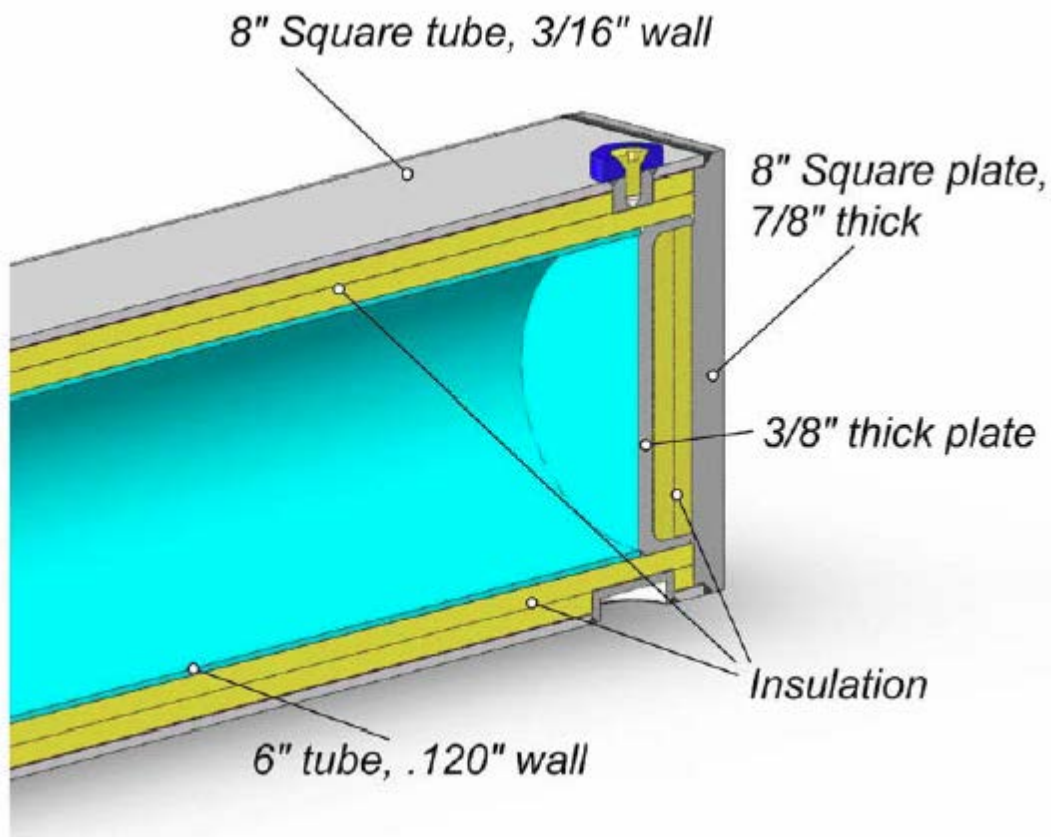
Bottom End of Single Element ATR Fresh Fuel Shipping Container
